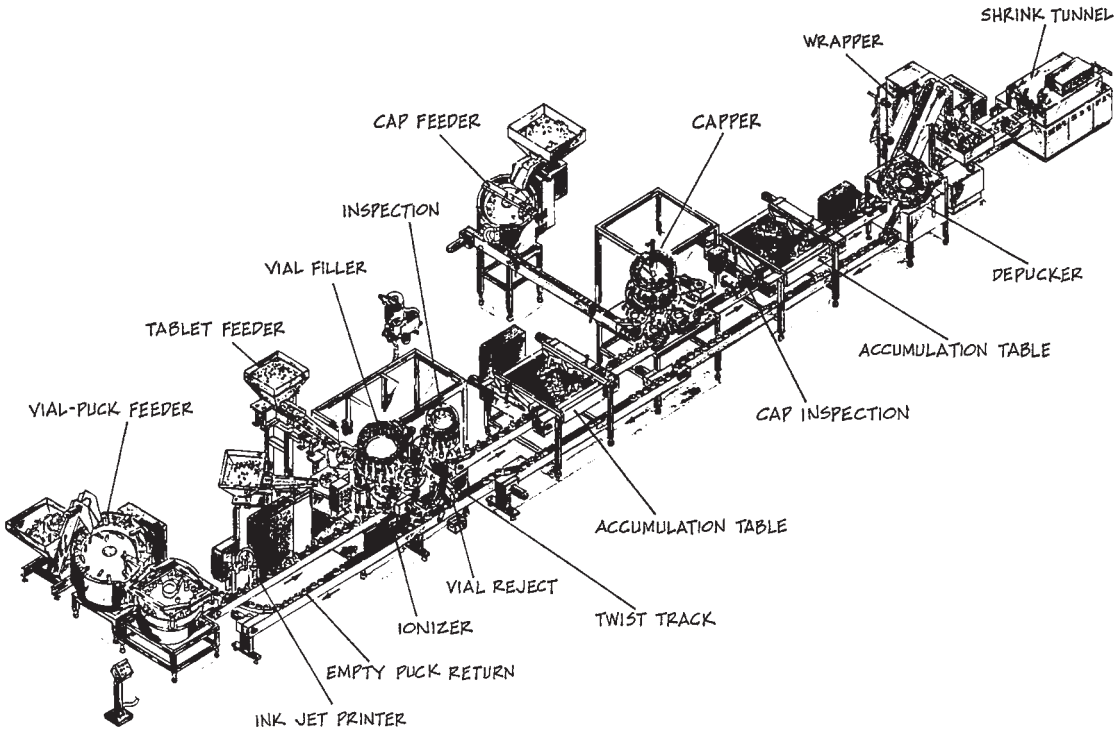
An integrated packaging line for a tableted product in glass vials (bottles). Machine vision inspection systems check key variables. (Courtesy of Pharmaceutical & Medical Packaging News, Paoli, PA 19301.)
